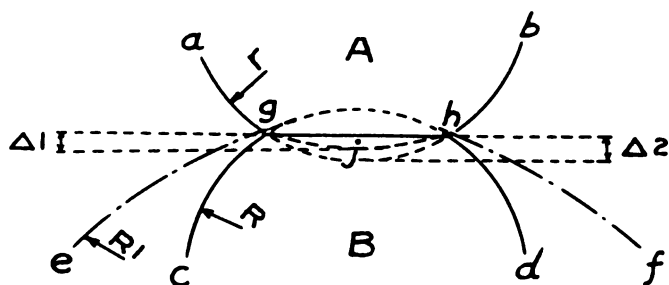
Pinion and gear, with arcs of their tooth faces.
